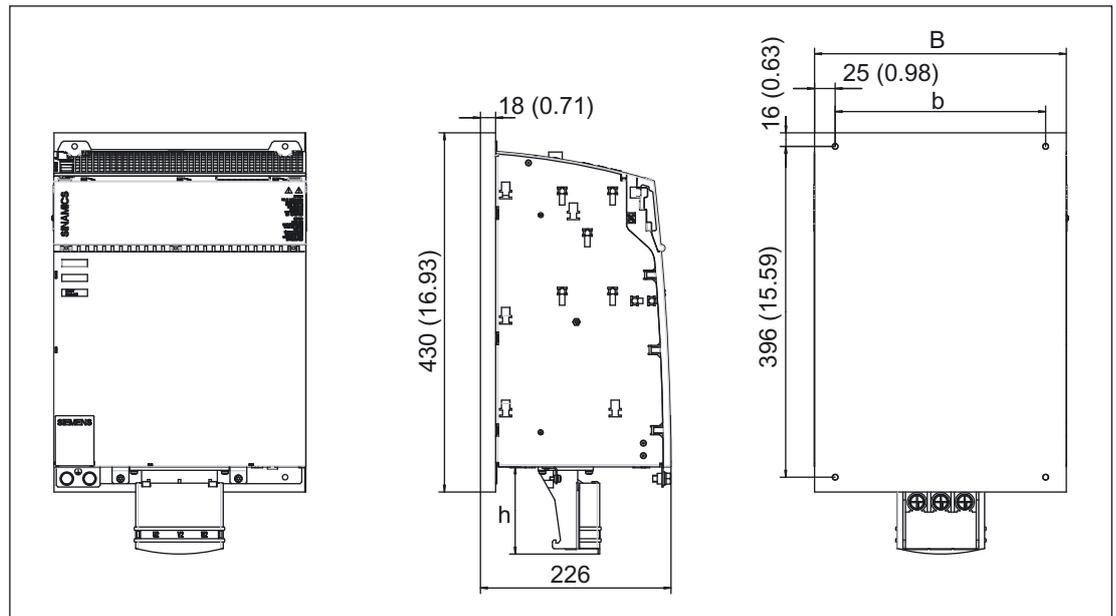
Dimension drawing of Motor Module with cold plate (132 A and 200 A)
